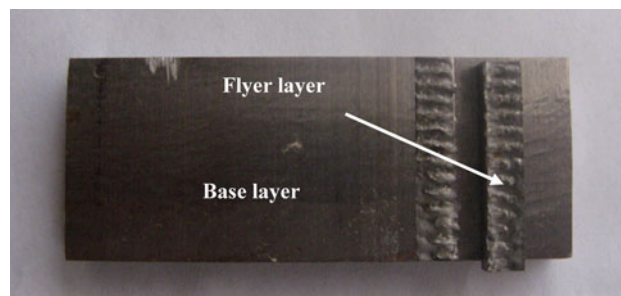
Failure view due to shear test of explosively welded specimen. The figure shows view of the failure of specimens after shearing test. It can be seen that separation is only observed at the interface
